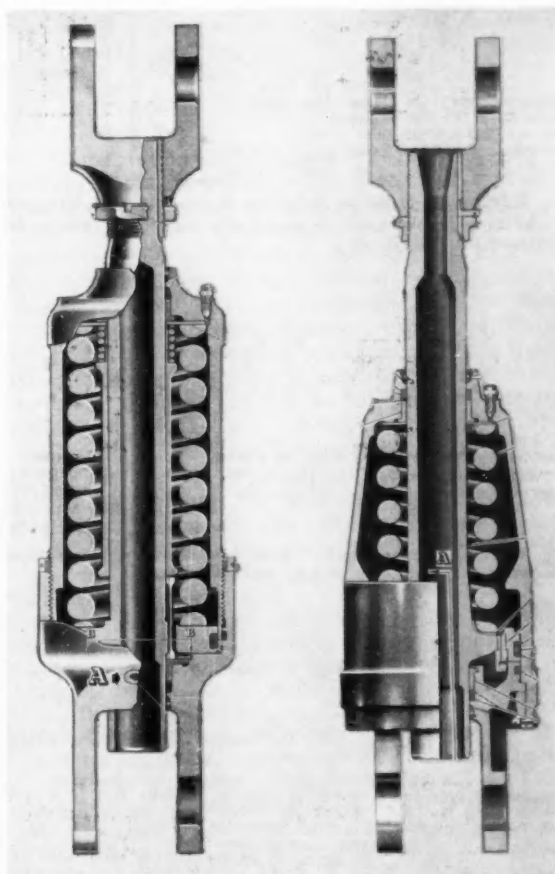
Constellation (749) main landing gear drag strut damper spring; on the left the old design, on the right the new design featuring a smaller spring and housing. The new design resulted in a weight saving of 55 lb per airplane.
